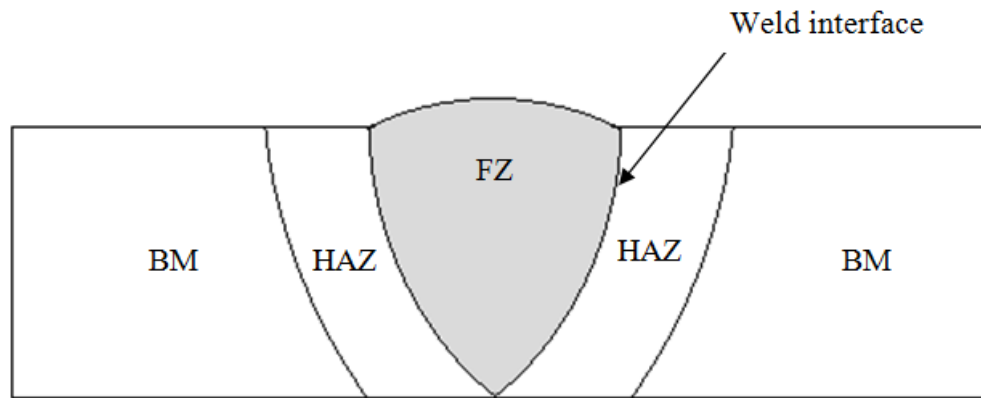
Macrostructure of typical fusion weld joint
